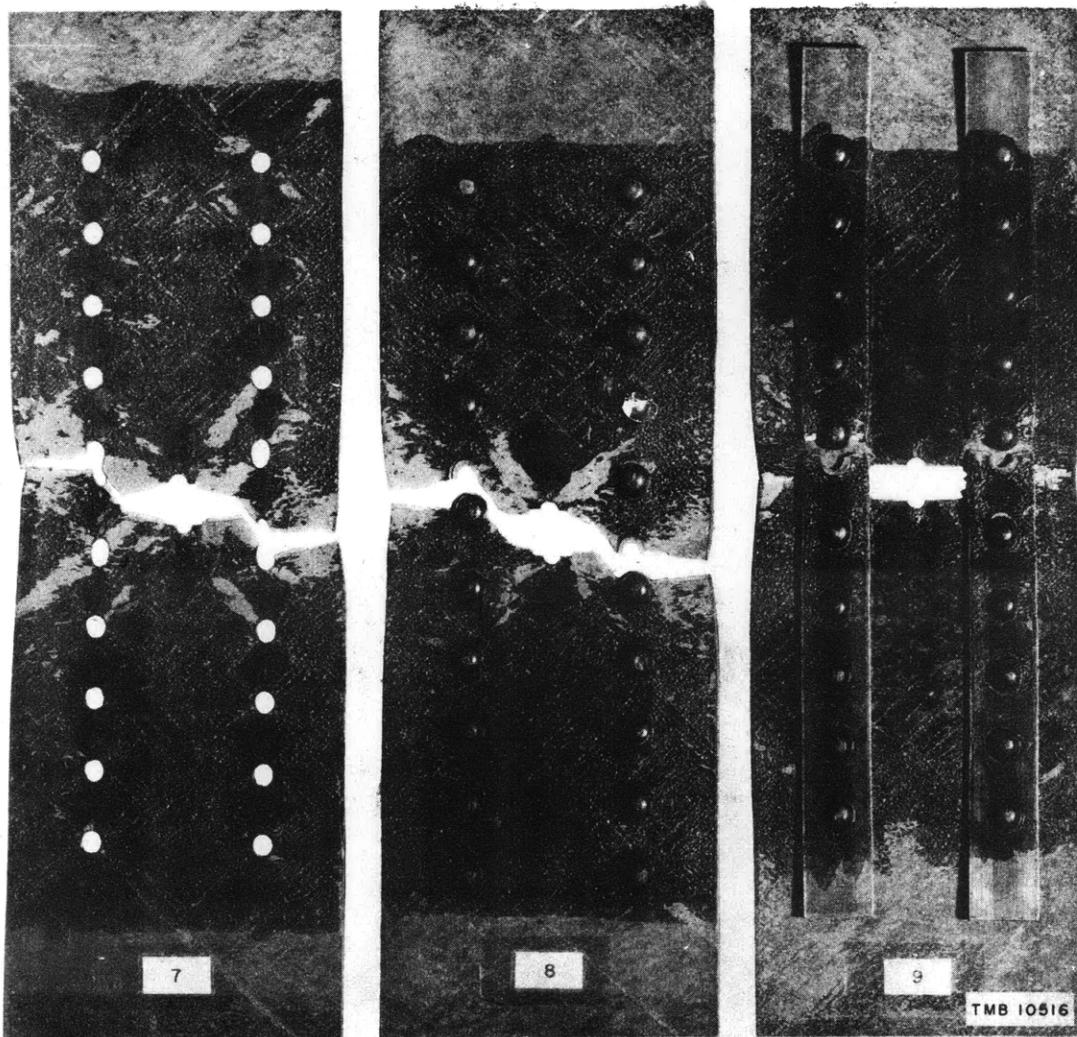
Specimens 7, 8, and 9 with Holes Open, Filled, and Strapped
